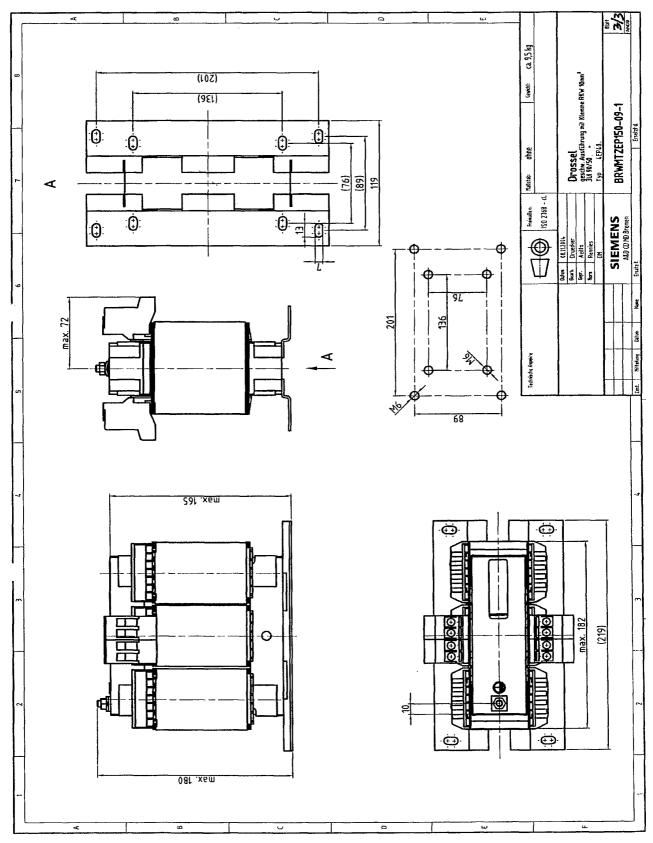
Dimension drawing of line reactor for the Smart Line Module 16 kW
